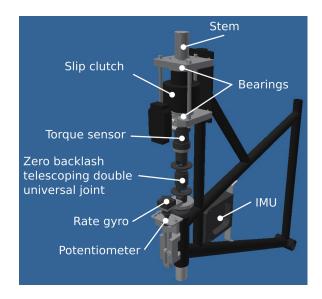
The steer torque sensor isolation design. The handlebars attach to the stem which is mounted in the upper bearings. The fork and steer tube are mounted in the normal headset of the bicycle. Between these two sets of bearing the stem is connected to the steer tube via the torque sensor and a zero backlash telescoping double universal joint. The steer angle and rate are measured at the steer tube and rate and acceleration of the rear frame are collected with the IMU.
